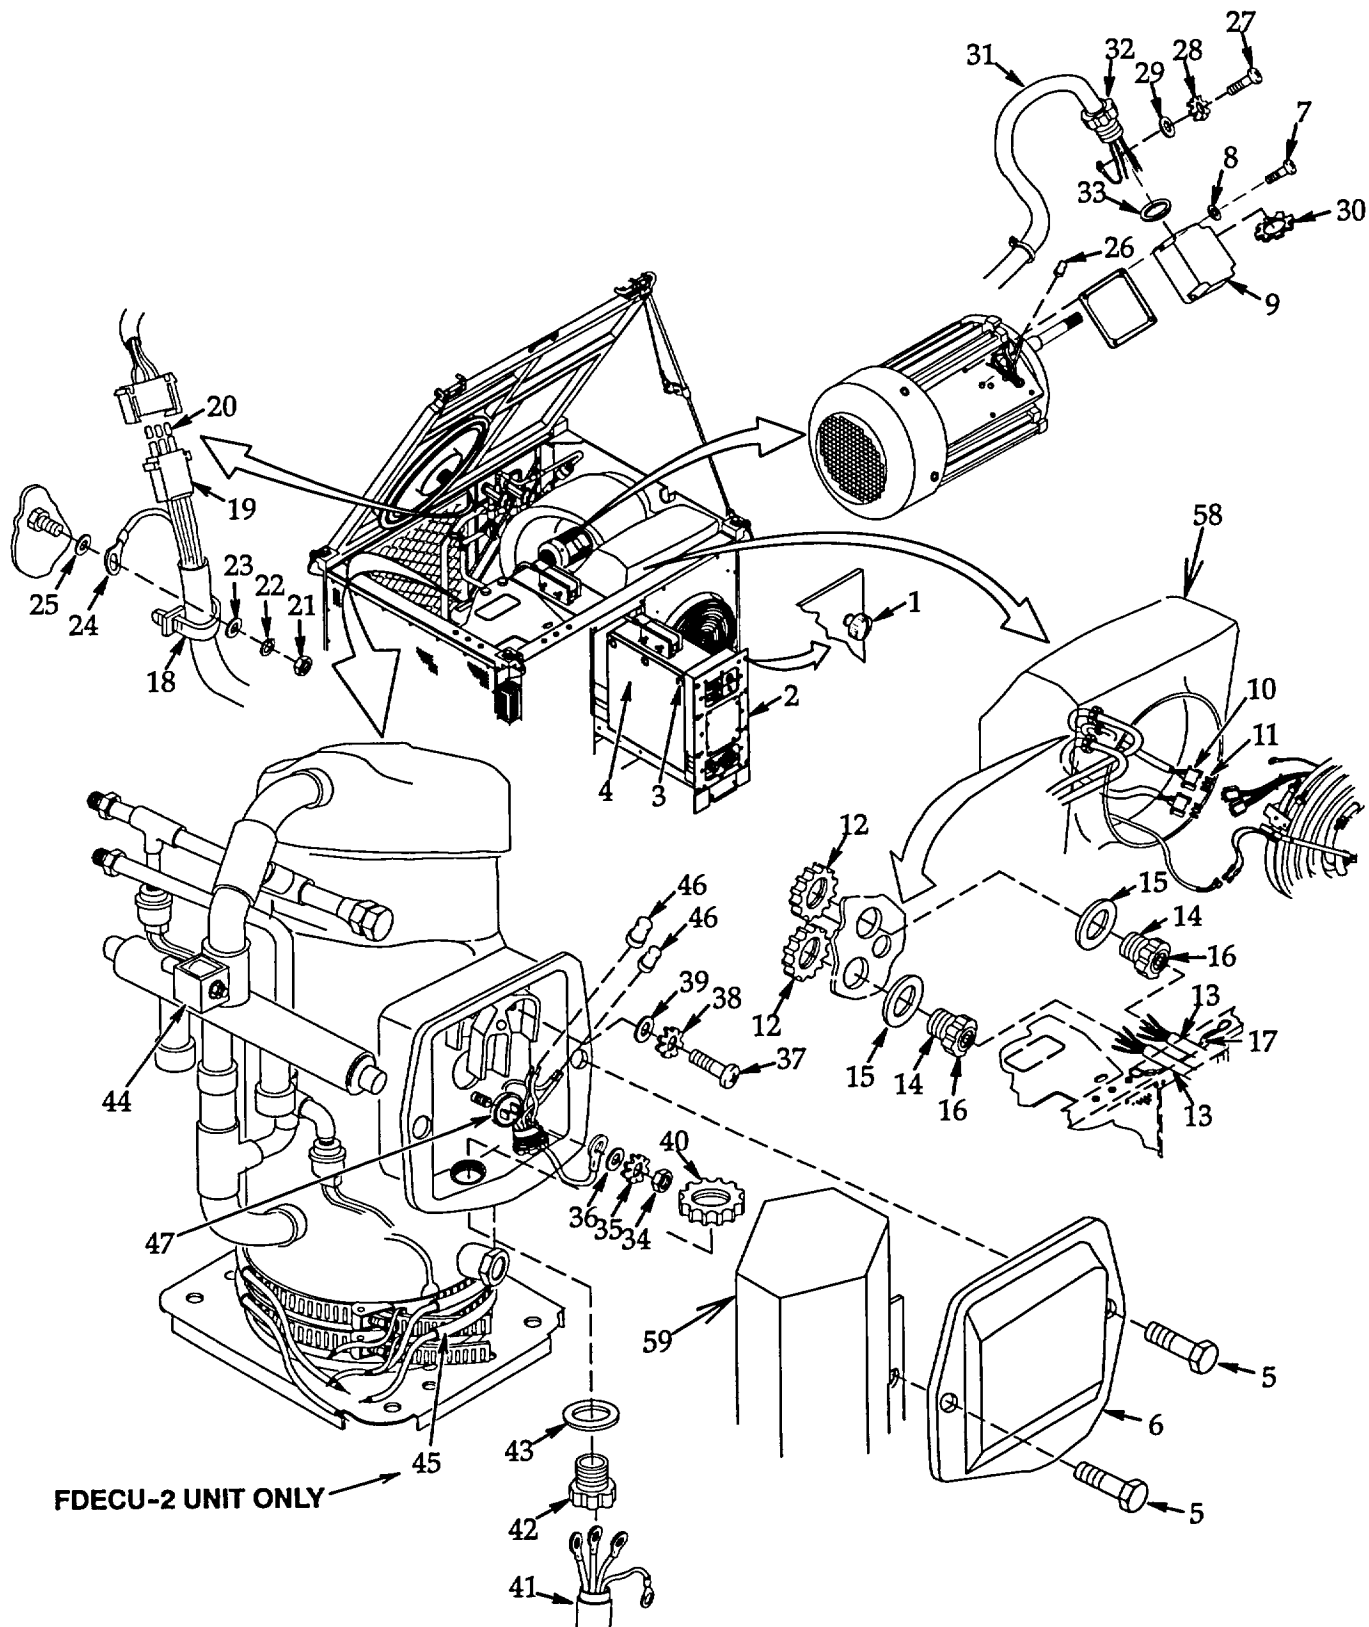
Power Box Assembly (Sheet 1 of 2).
